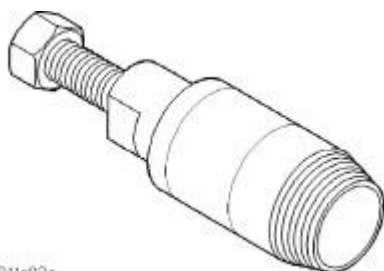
Crankshaft Sprocket Remover Insert C-4685-C2
